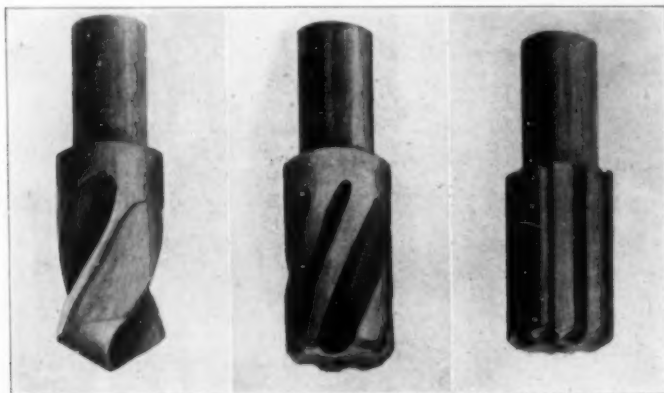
Cast High-Speed Steel Twist Drill for Turret Lathe.
